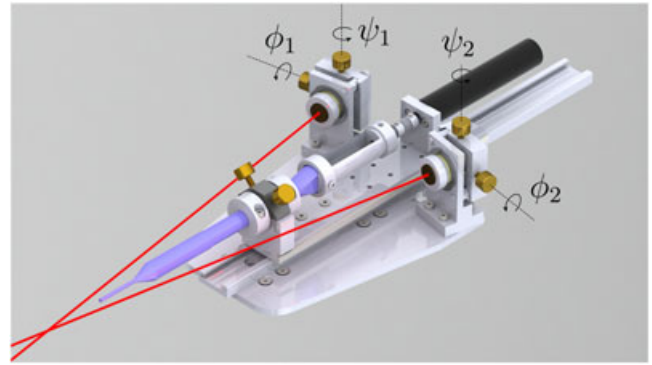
CAD model of the RCM laser tool holder (isometric view)
